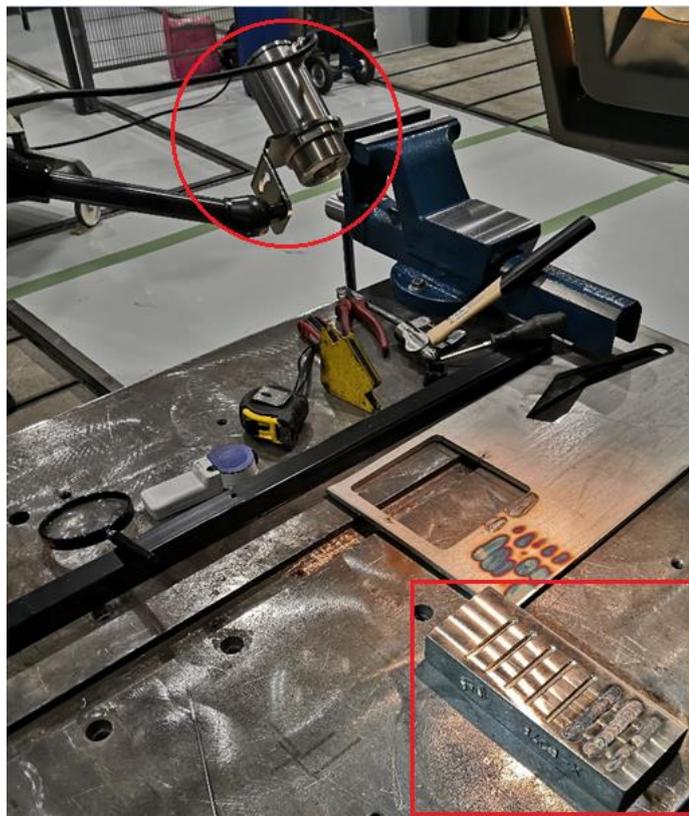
Test setup at LUT Laboratory of Welding Technology. Pyrometer highlighted at the top left corner of picture. Test specimen with machined grooves and already produced test welds can be seen at the bottom right corner.
